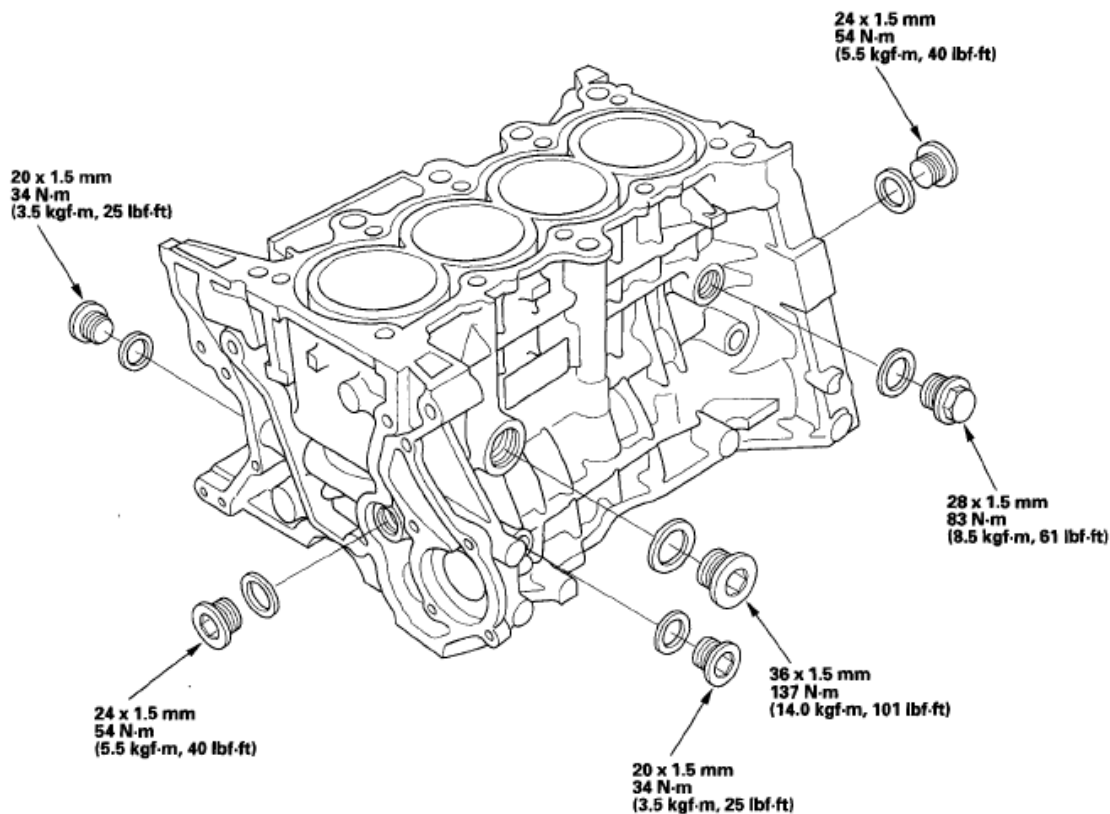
Identifying Drain Bolt/Sealing Bolt (With Torque Specifications)
